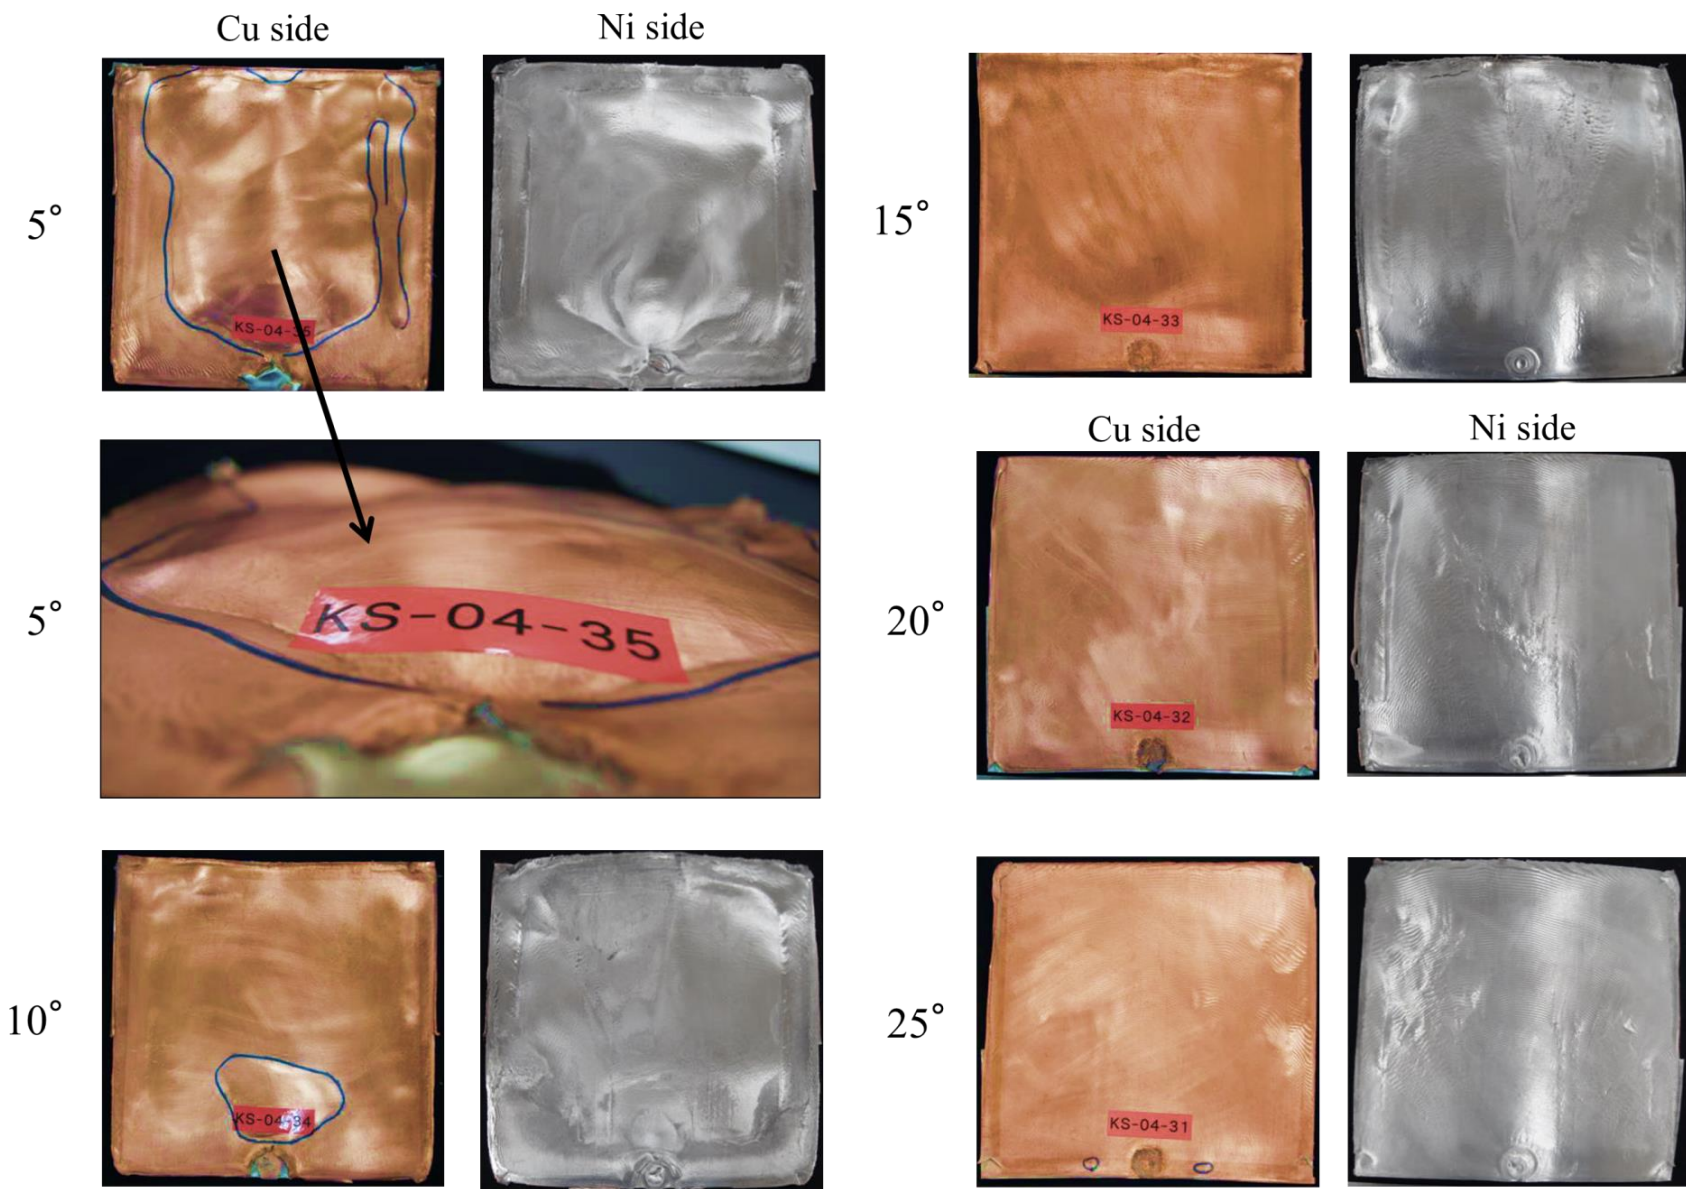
7 Outlook of the explosive welded Cu/Ni joint for each condition.
